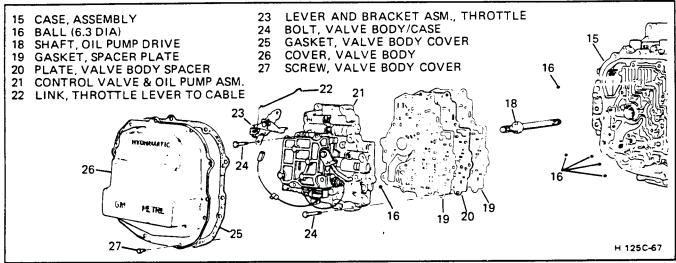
Control Valve Pump Assembly, Oil Pump Shaft
